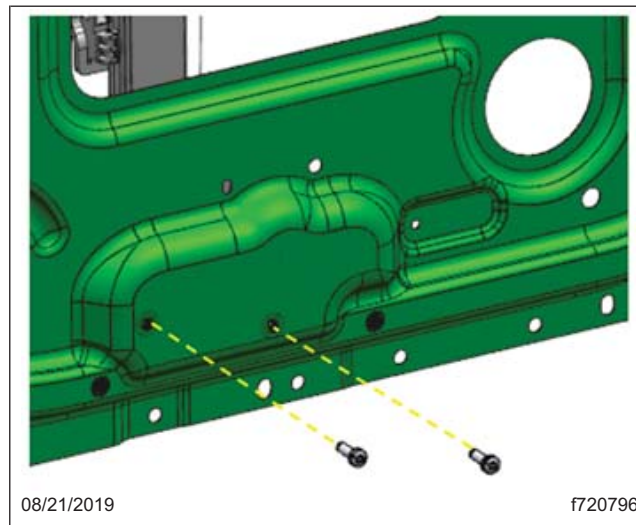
, Screws Fastening Assembly to Lower Inner Door Panel
